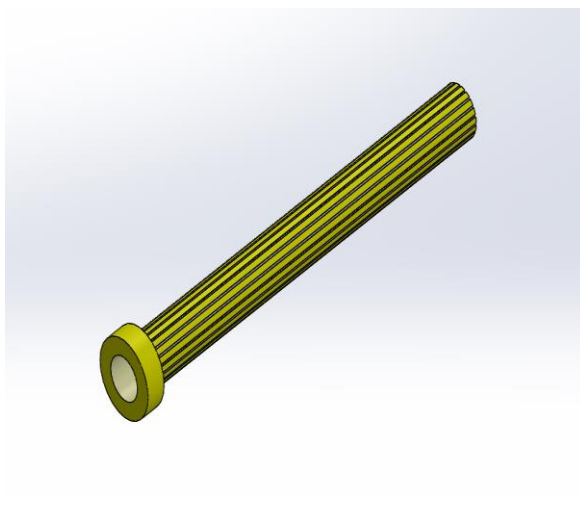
ISO view of Linear motion ball bearing (LMBB)
